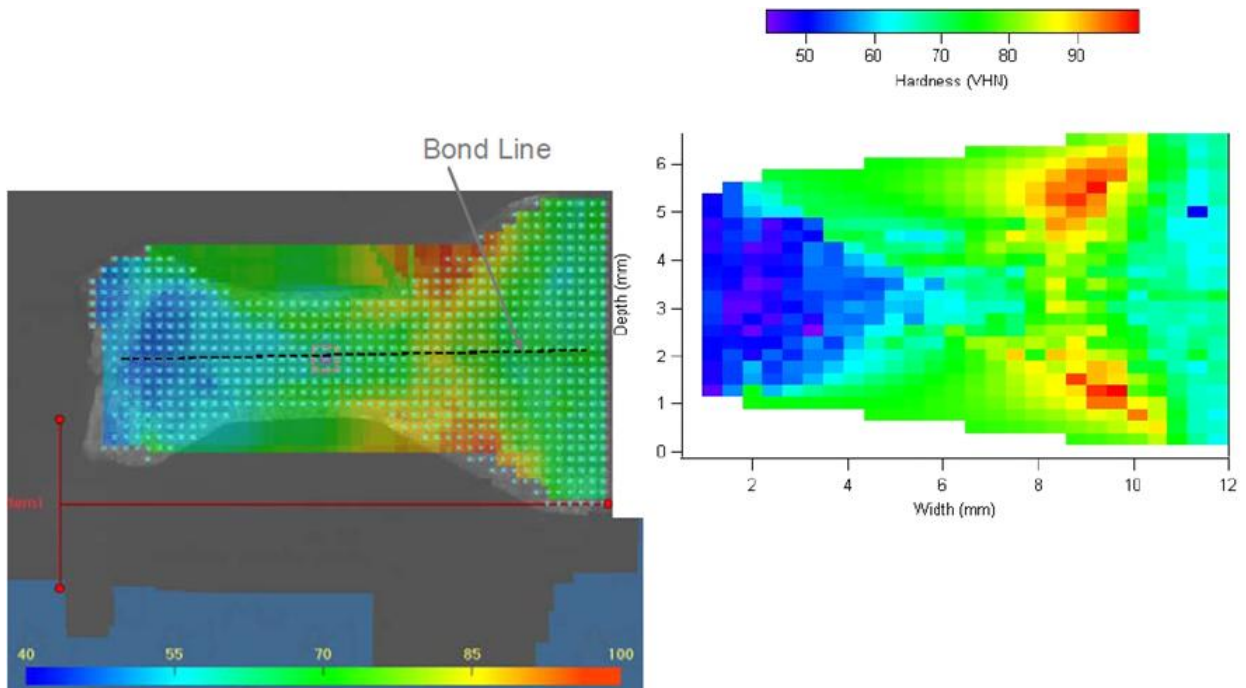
Microhardness of Parallel-Wire Weld (Weld 240) for Weld Cross Section Shown in Figure 12
